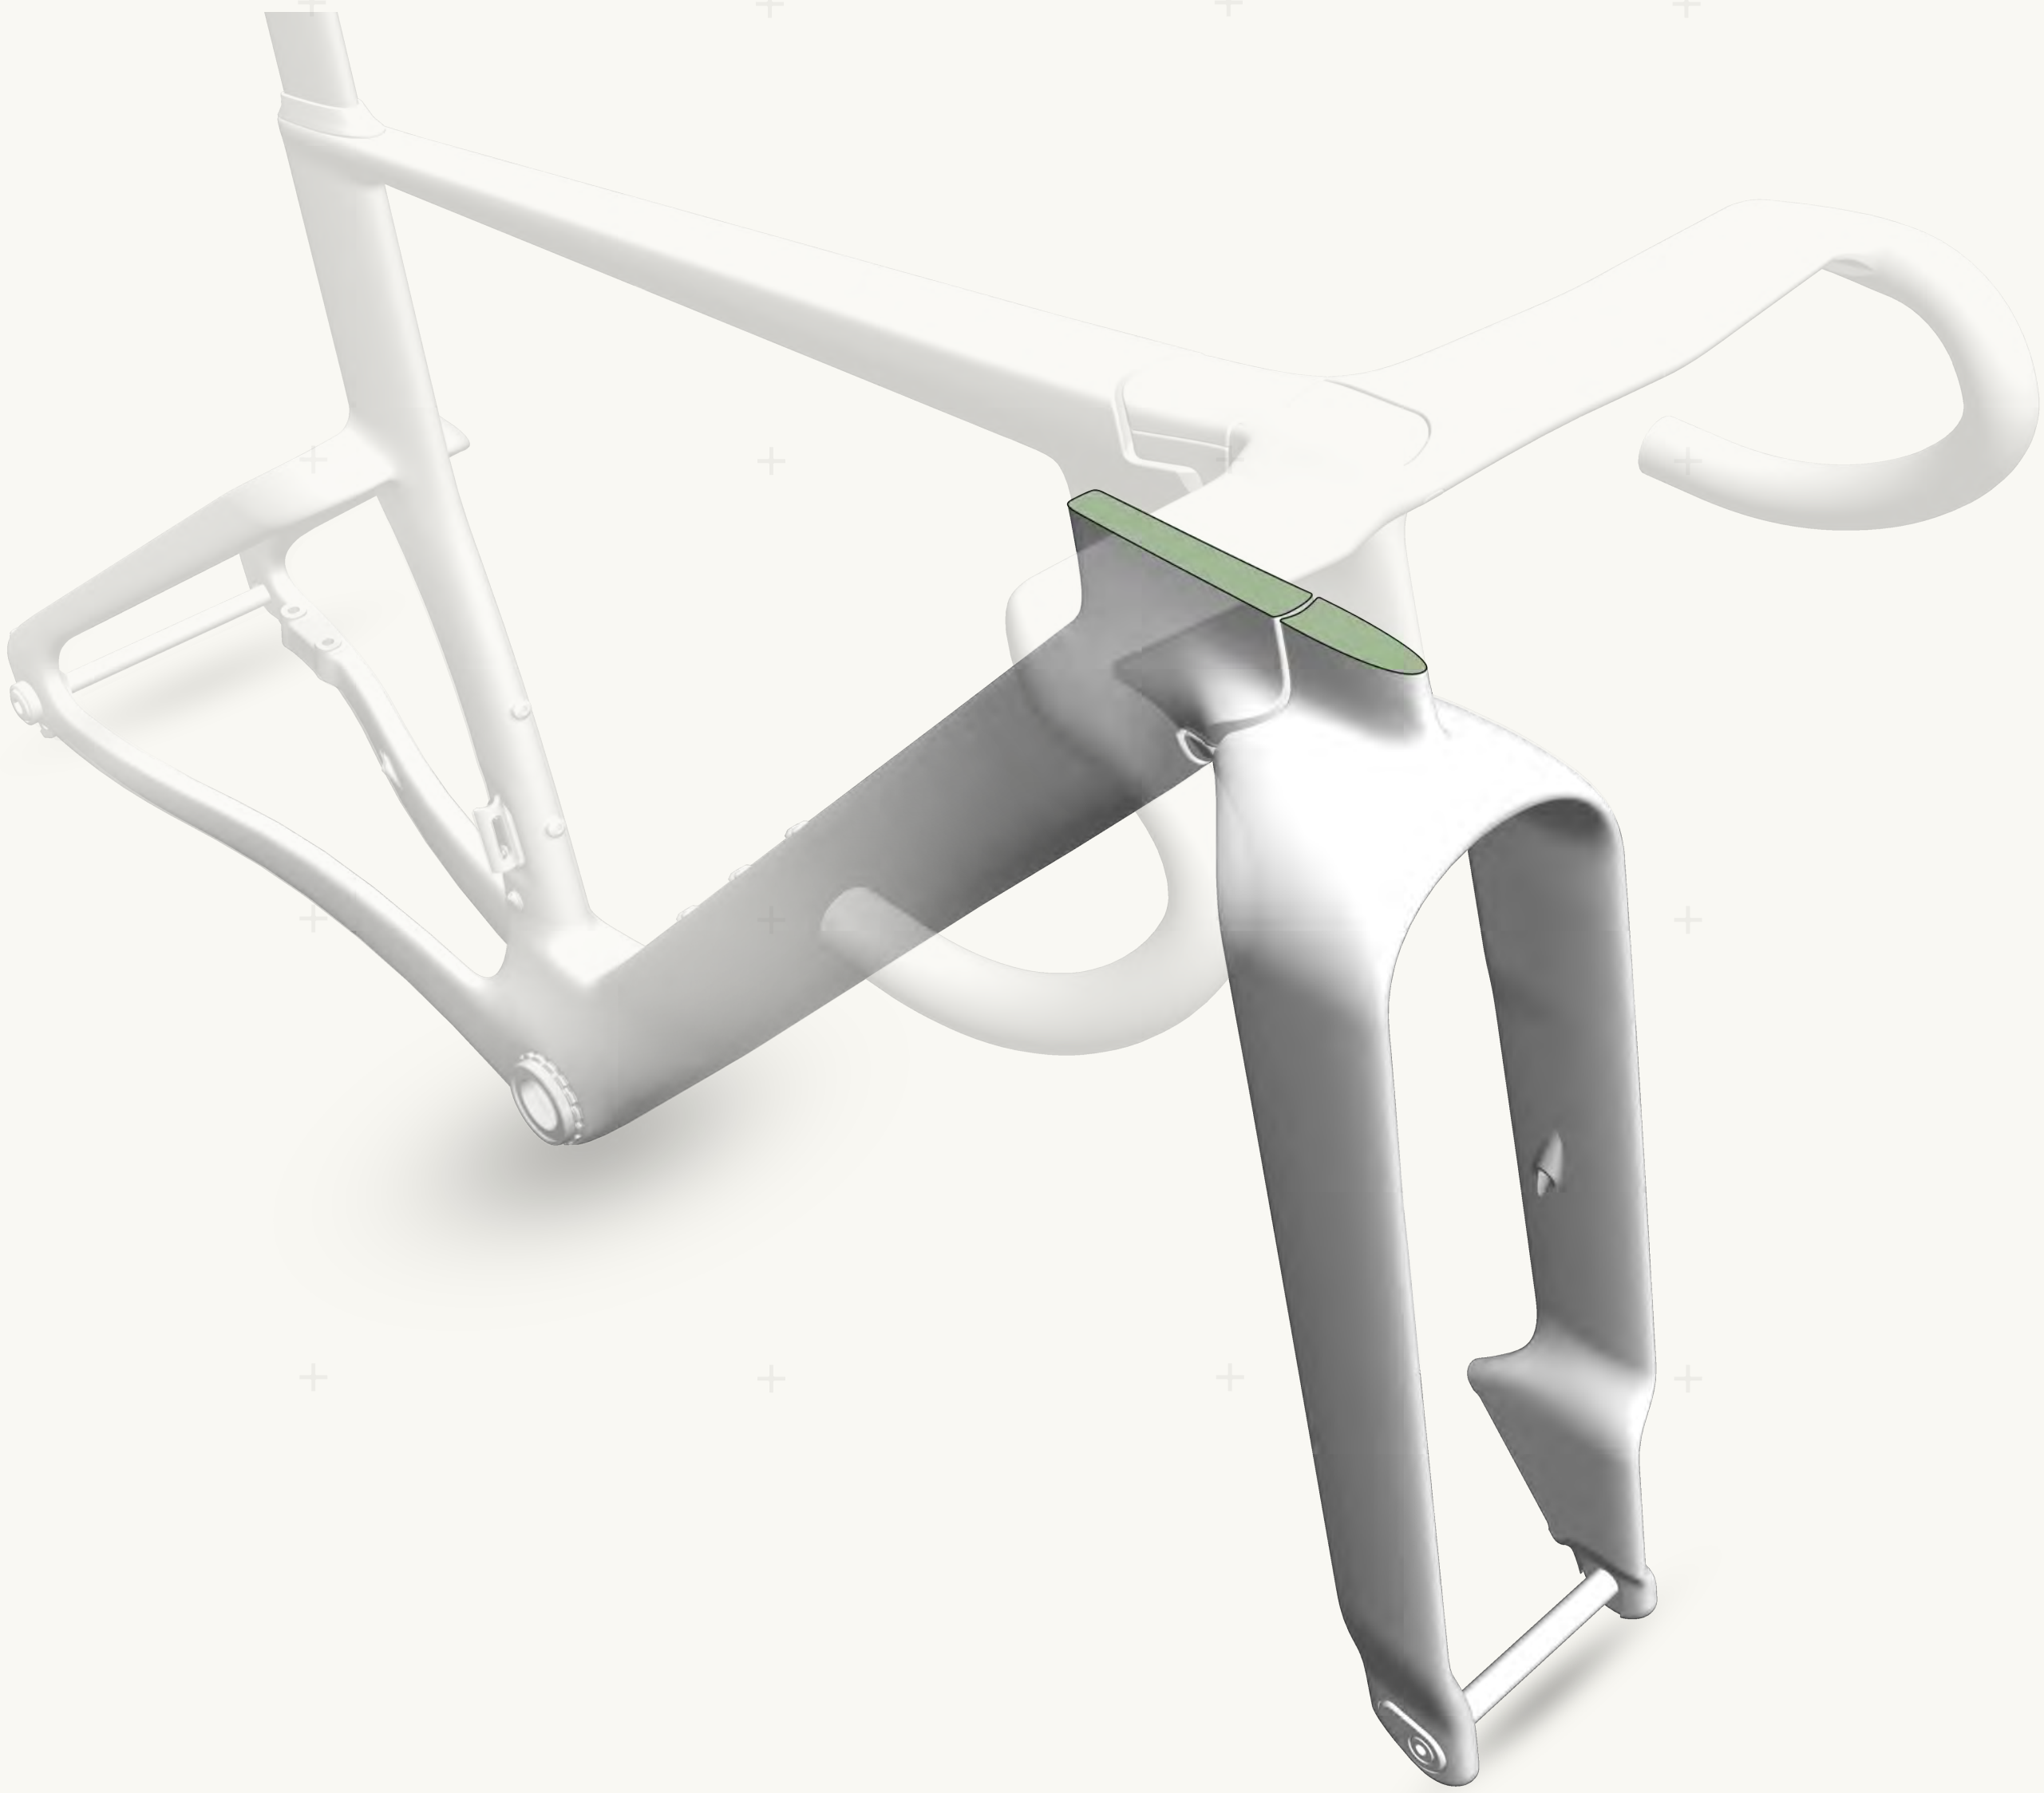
BAYONET FORK & CHIN FAIRING SECTION CUTAWAY
